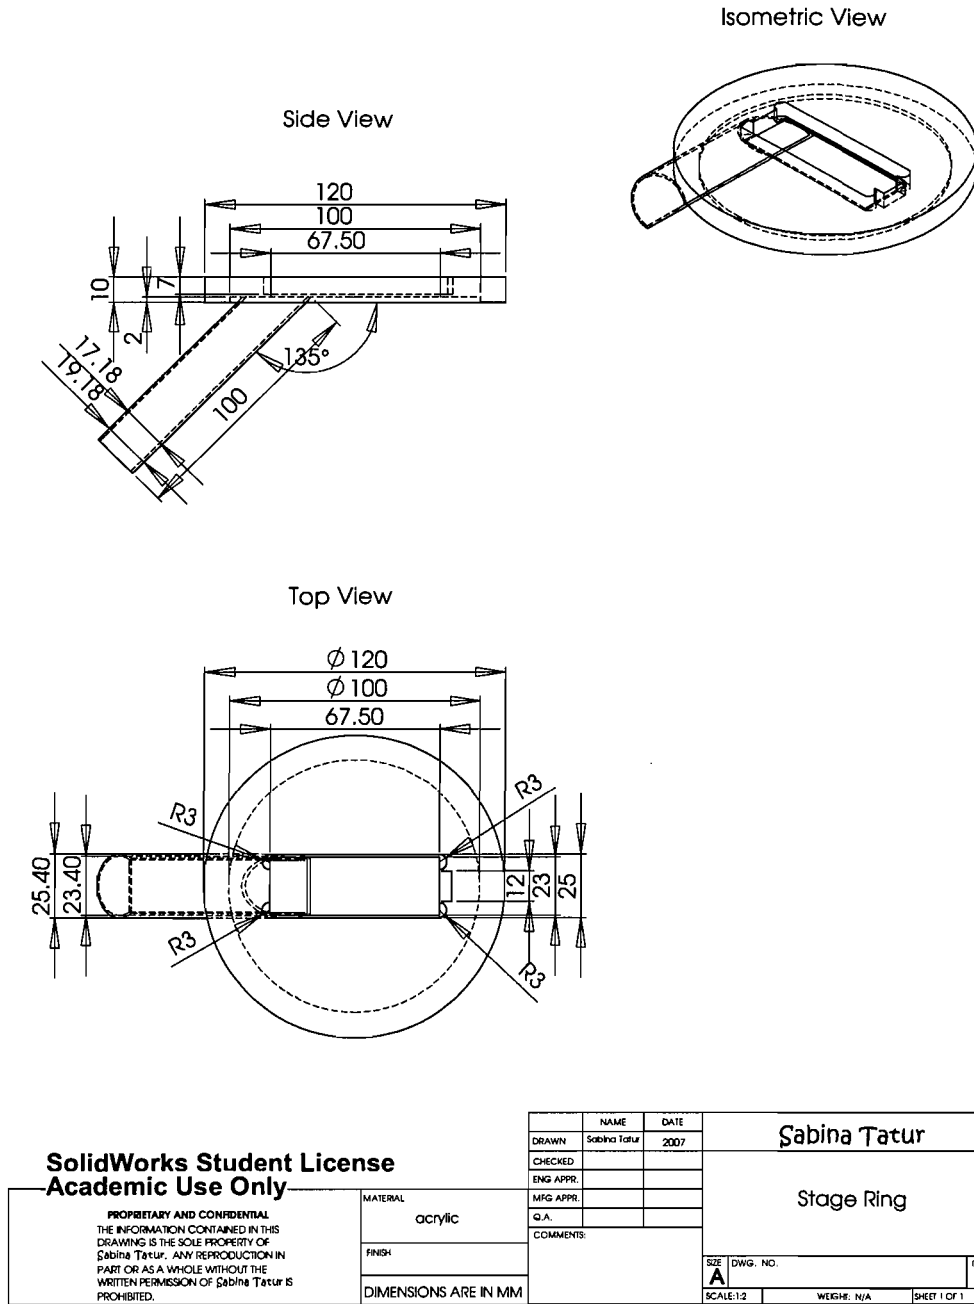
Detailed 2D engineering drawing of the stage ring with air inlet
